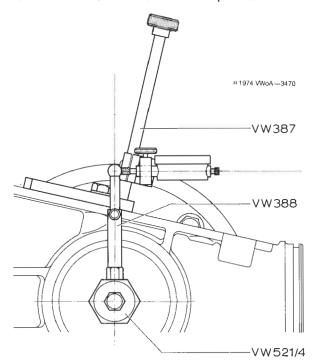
Relative positions of measuring bar and dial indicator pin. It is important that they meet at a 90° angle on the vertical axis of the ring gear (broken lines).
